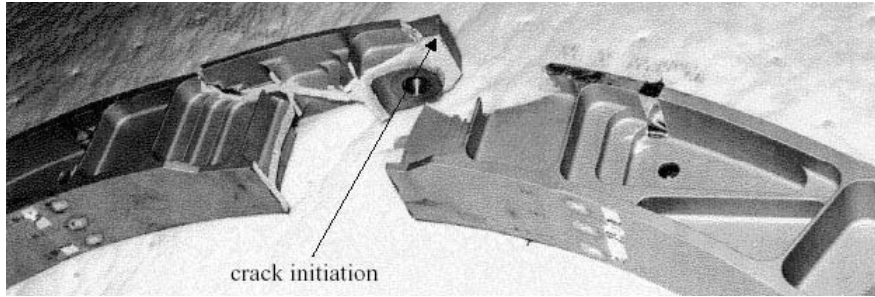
F-16 479-bulkhead test specimen number -7B, post-failure crack initiation
